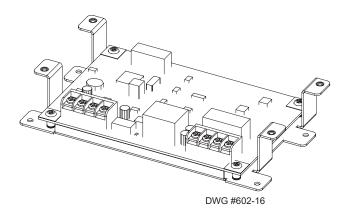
PAD100-SLCE / SLCE-127 Board & Showing Mounting Bracket
